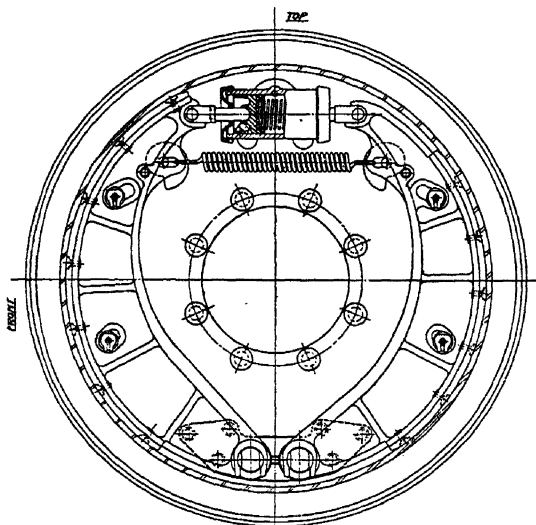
Modern Hydraulic Brake Drum Unit.
